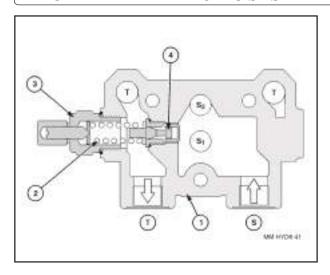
SYSTEM RELIEF VALVE CLOSED
